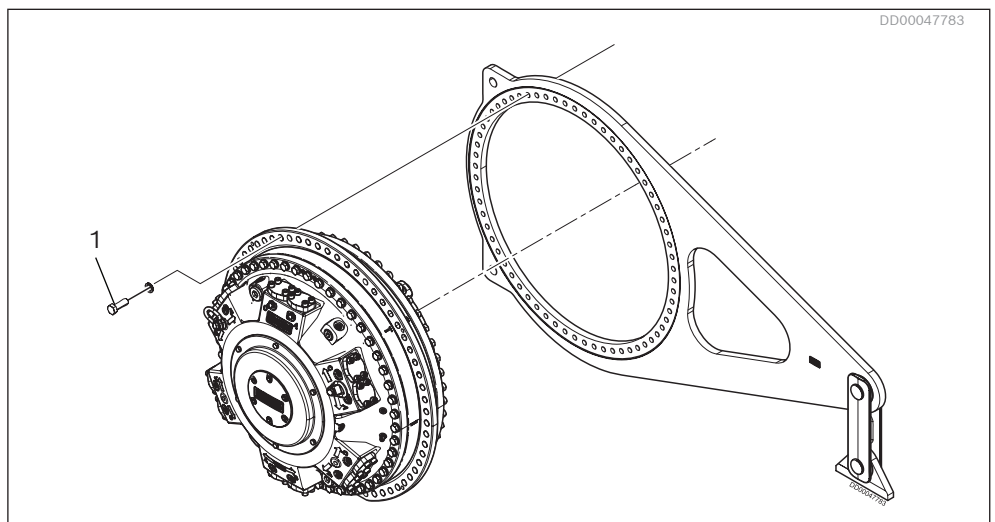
Mounting single ended torque arm TC A 2000 and TC A 4000 for CBm 2000 to CBm 4000
